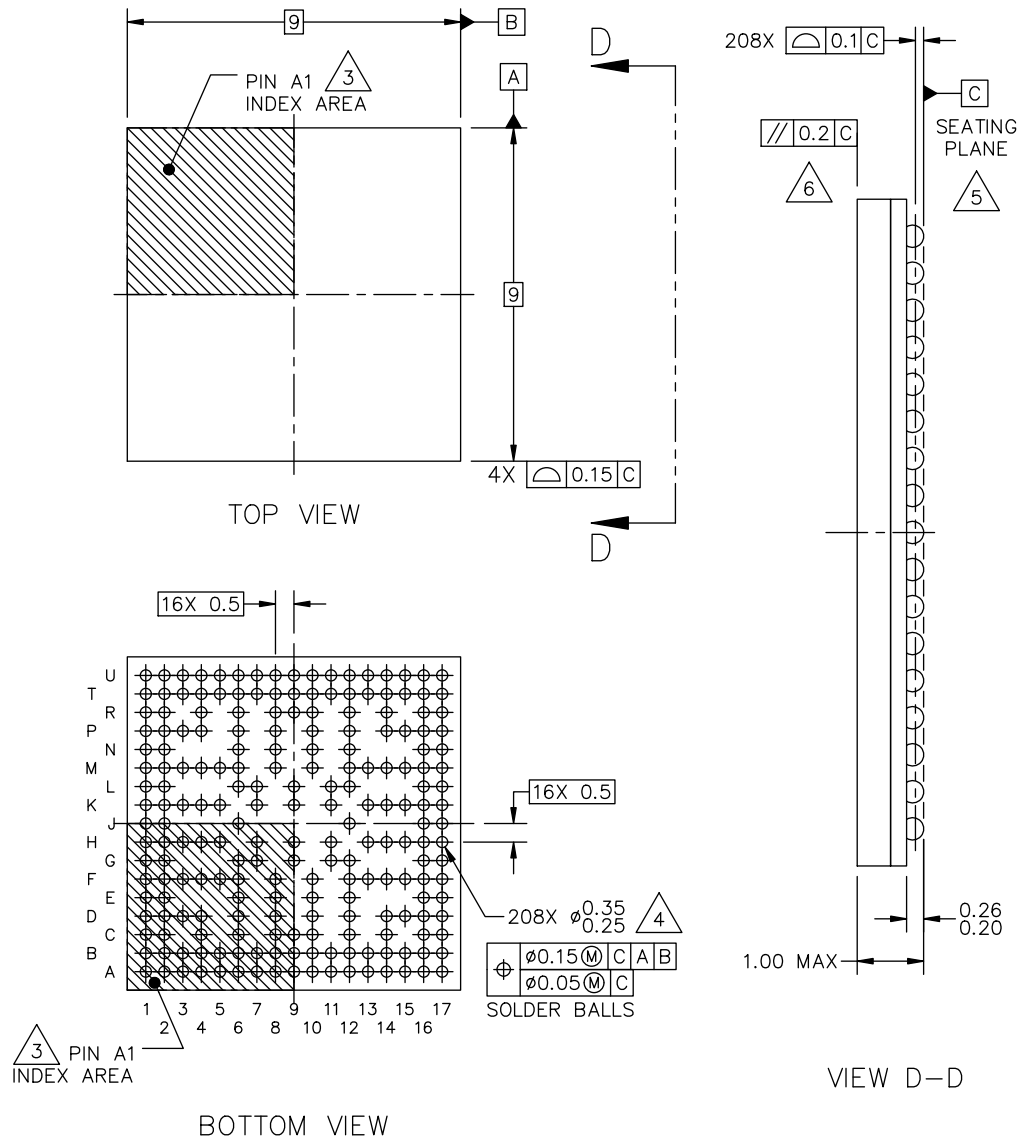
9 x 9 mm FCBGA, case x package top, bottom, and side Views
